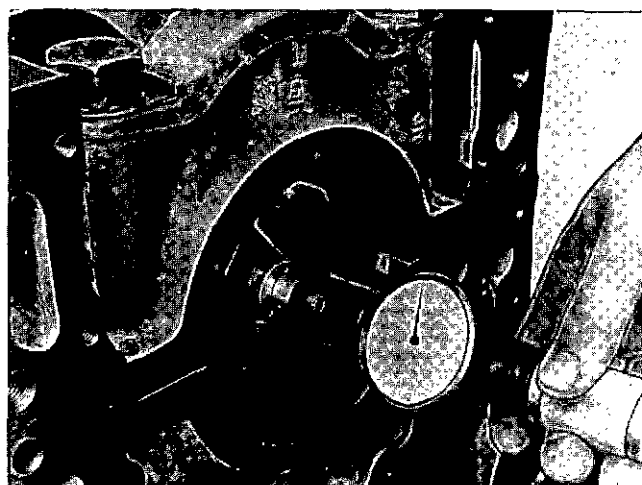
, V40103. Checking main bearing bore for out-of-round
